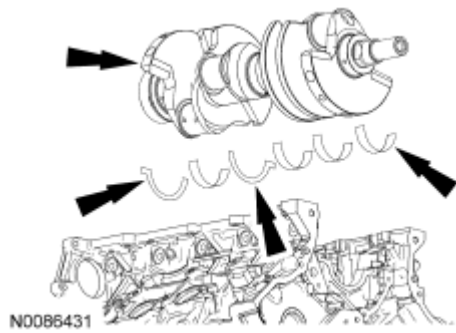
Identifying Crankshaft, Upper Crankshaft Main Bearings & Upper Thrust Washers
